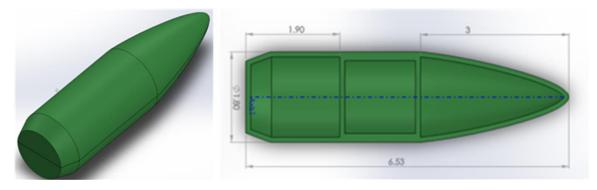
Projectile Sheath in Full Assembly and Half Assembled 6.2.8 Projectile Loader
